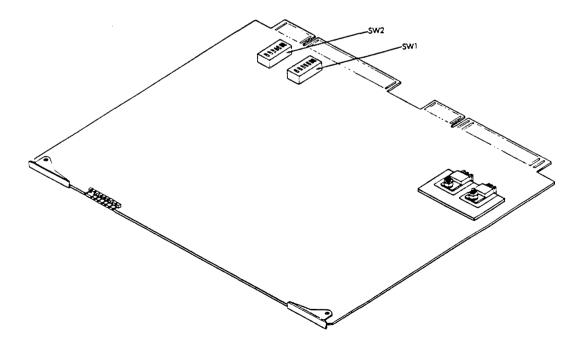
SI 9798 Sector Count Switch Locations on VOIM PCB
